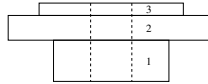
The steel part of the gear wheel D at the motor shaft.
